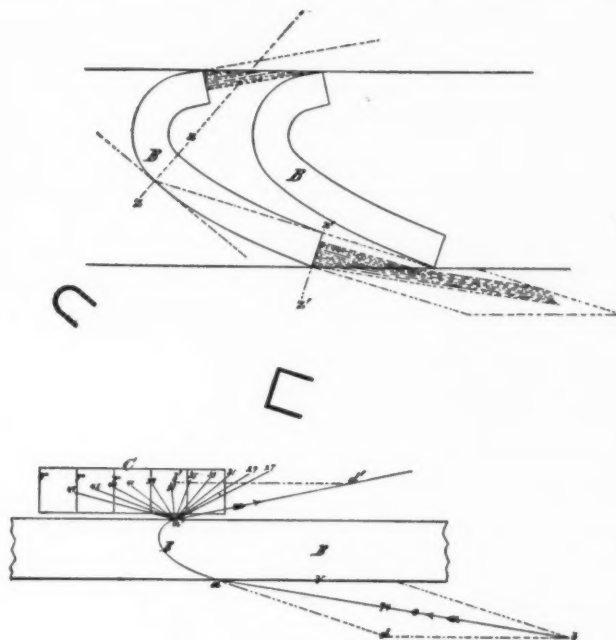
PATENT DRAWING SHOWING SHAPE OF HESSE'S BUCKET
